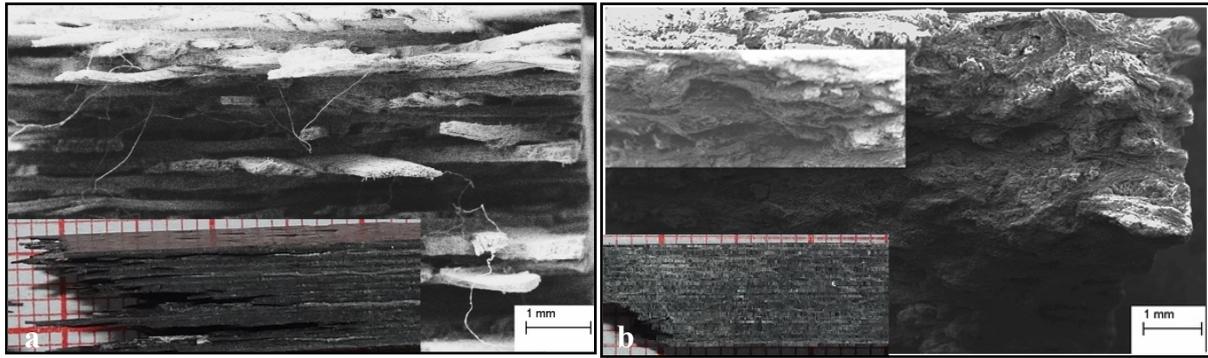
Fracture surfaces of (a) type A disc and (b) type B disc
